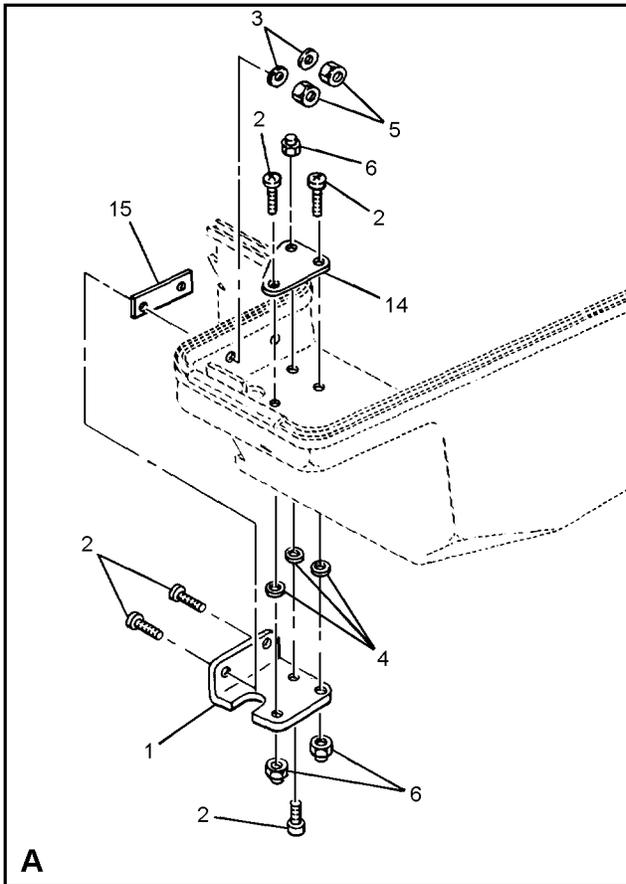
Lower Container Assembly (Rocket Jet P/N 283100-17) and Handle Assembly (Rocket Jet P/N 7110015) (Sheet 2 of 2)
